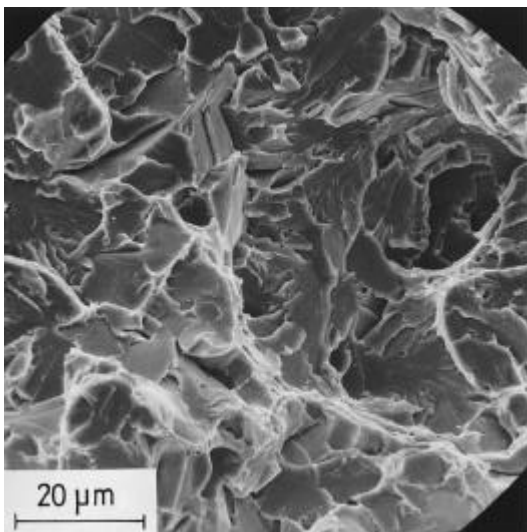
Lower shelf fracture surface of a CVN specimen of steel 1
